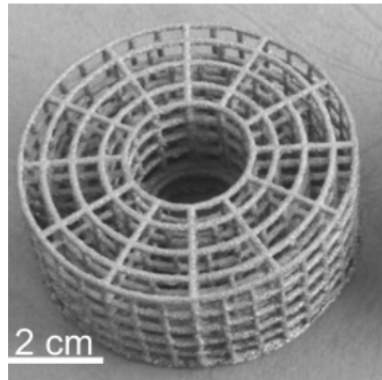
SiSiC component fabricated by 3D printing.²³
